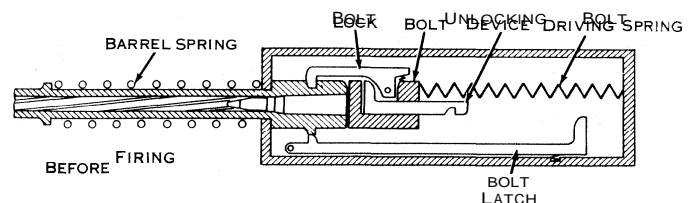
SCHEMATIC DRAWING OF LONG RECOIL SYSTEM
